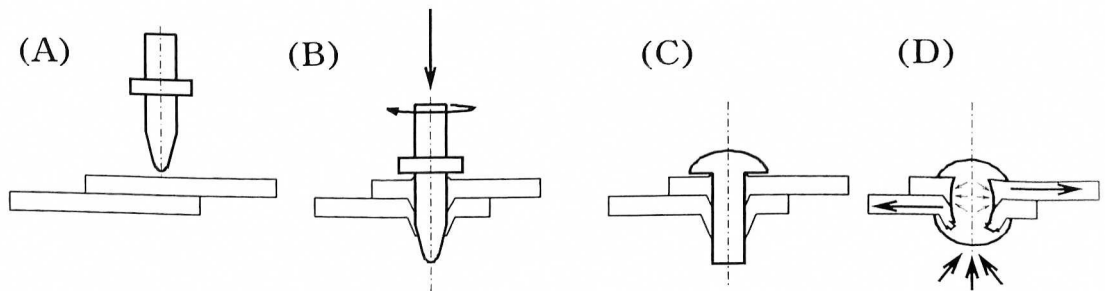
Working process of flowdrill operation; (A) starts, (B) bush forming, (C) rivet forming (D) finish of rivet joint.
